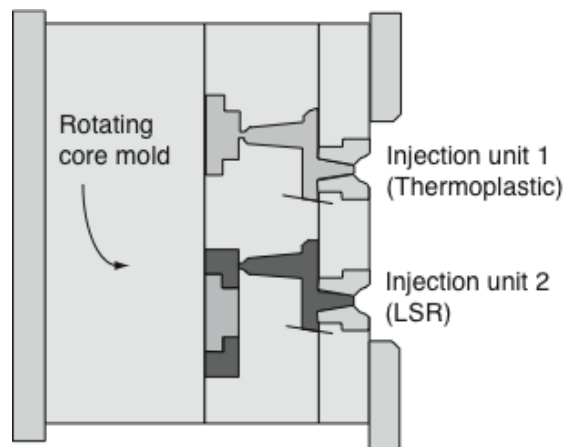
Schematic diagram of a rotating mold used to produce multi-component injection molded parts.
